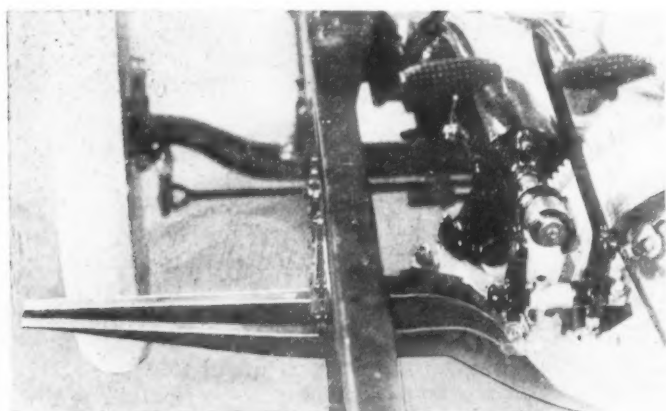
On the Briscoe the rear end support is extended to form a running board bracket
